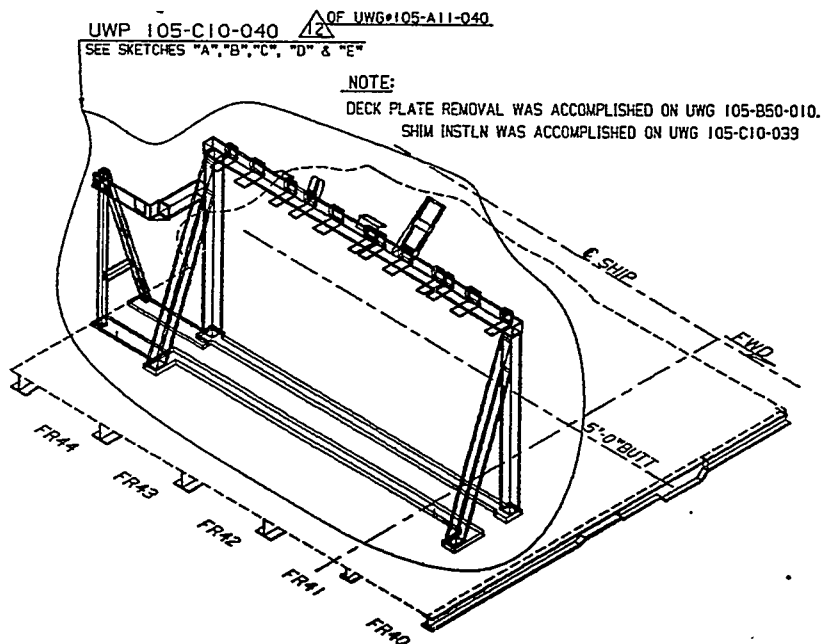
Page from a Unit Work Procedure Issued for the Installation of Deck Shims to Support a Foundation.
